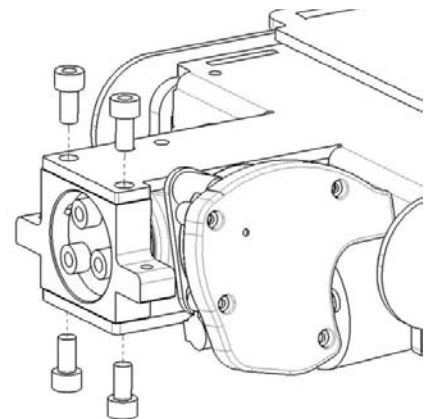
Mount the four screws holding the rear edge of the actuator.
